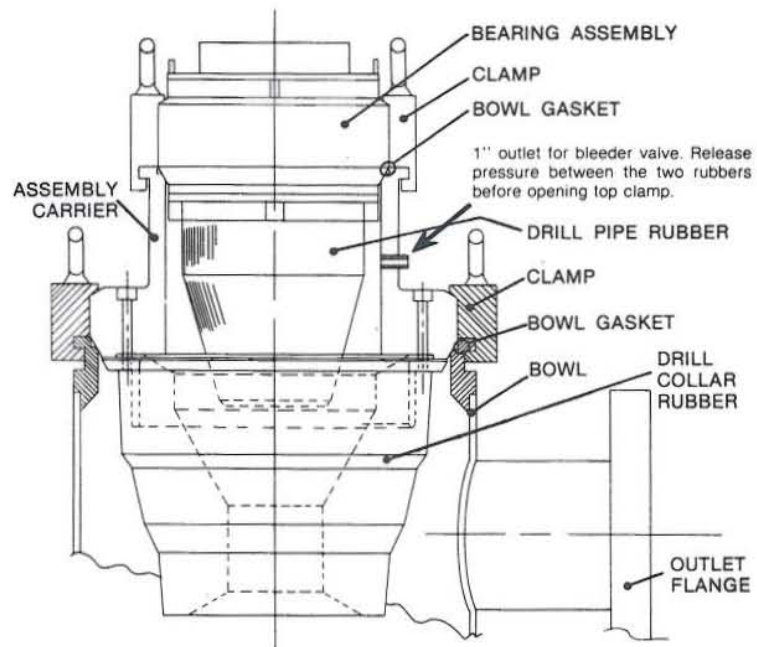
A cutaway view of a rotating head model for geothermal wells (Williams Tool Co., Inc.)
